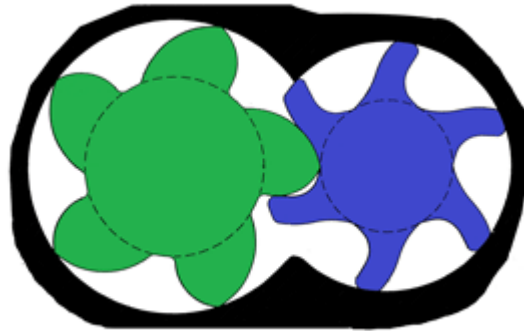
Cross-section view of the male and female helical screw rotors¹⁹
